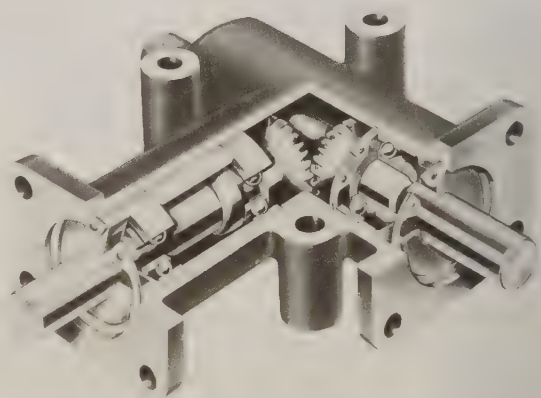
Internal retaining rings used to retain bearings (Rotor Clip Company, Inc.).
